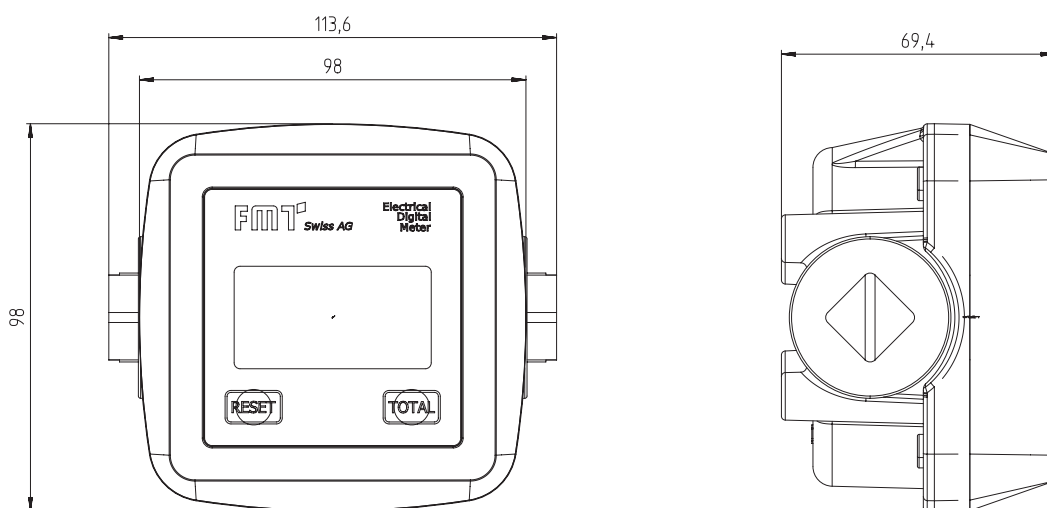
Mounting dimensions oval gear meter-digital (in mm)
